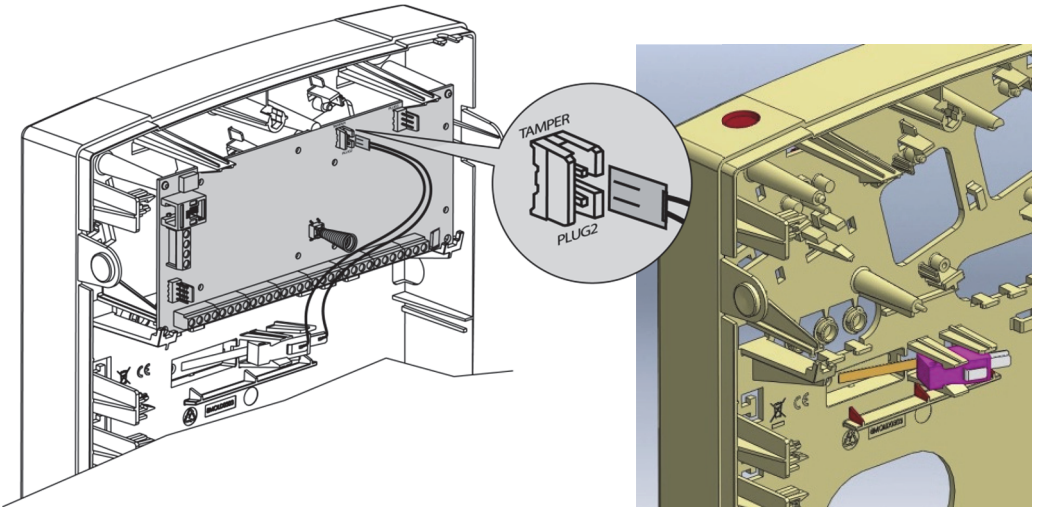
Perforated Back Tamper Release and Connection to PCB
